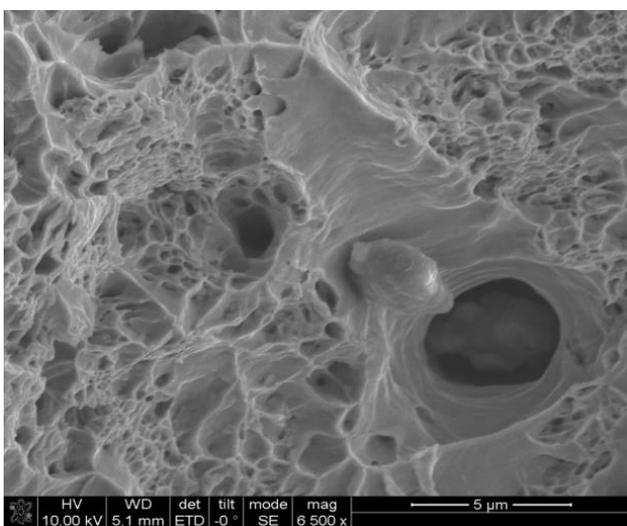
Fractograph of B770 Structure reveals dimple fibrous fractured surface.
